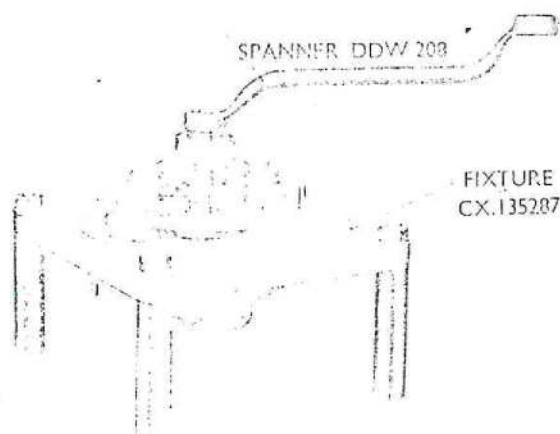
Removing the rotor shaft nut securing the thrust plate and bearing (rotor removed)
